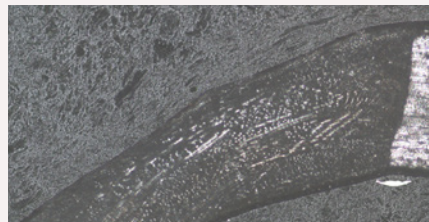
Improperly adjusted or worn weld box rolls cause incorrect weld seam thickness.
